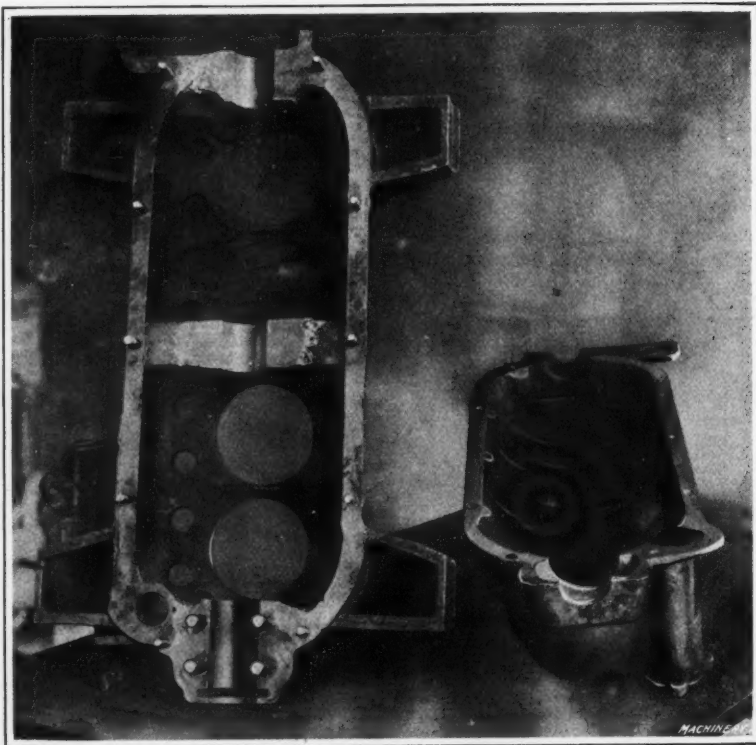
Both Halves of Crank-case Machined and ready for Assembling
